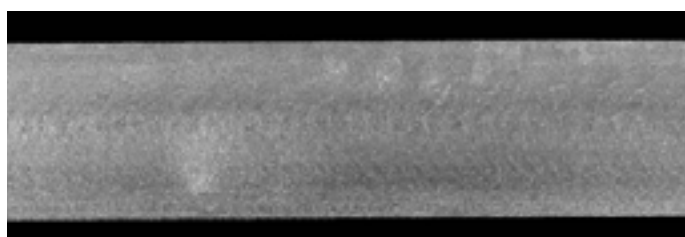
Macrostructure of the weld along the weld axis, in the stabilised welding state; welding parameters $V_n = 1120$ rpm, $V_z = 1120$ mm/min; Triflute type tapered tool; etchant: Keller's reagent [8]
